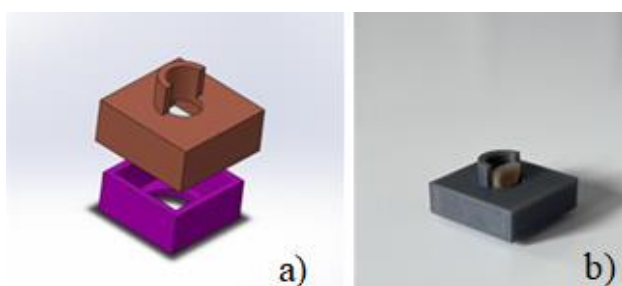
Design of a two-part Positioning Tool (PT) for uniform test specimen positions: a) 3D model of PT; b) 3D printed PT.
